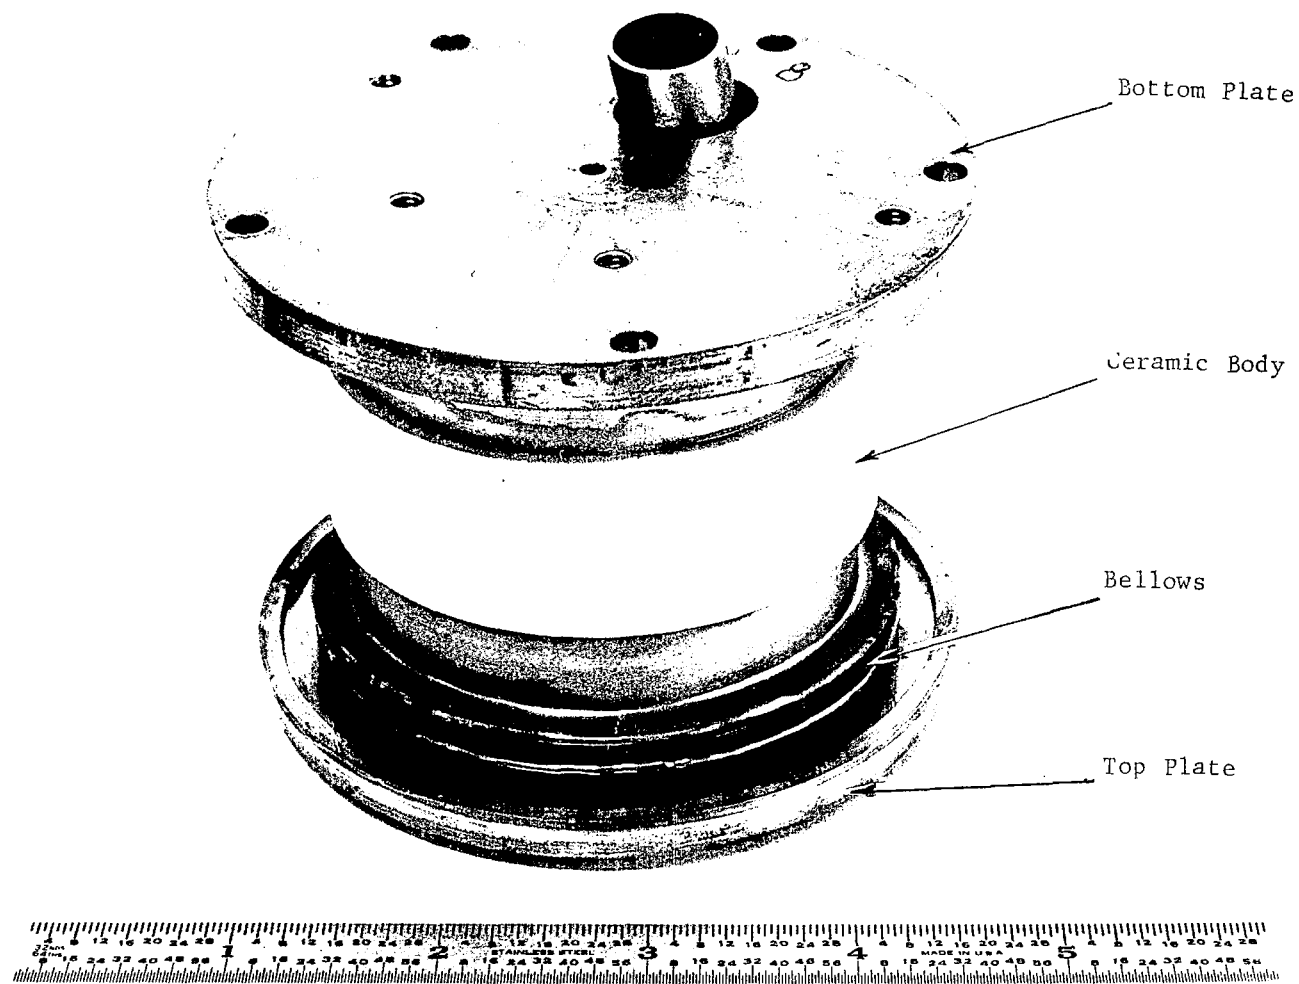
Completely Assembled Vacuum Contact Capsule, Before Evacuation and Seal-Off.
